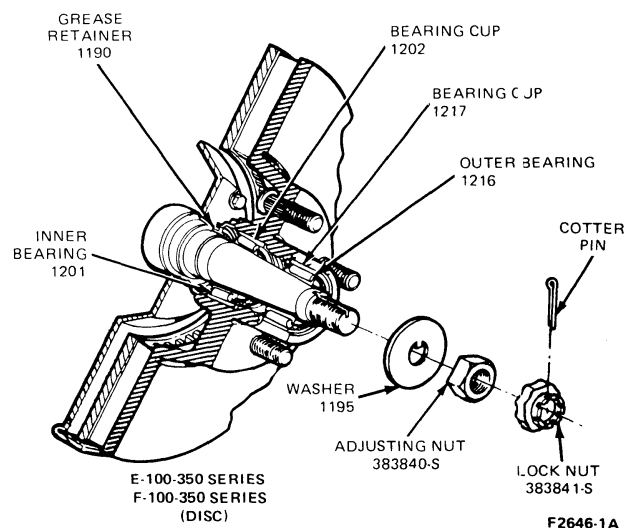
Front Hubs and Rotor Assembly Bearings and Grease Retainers F-100-F-350 (4x4) and E-100-E-350
